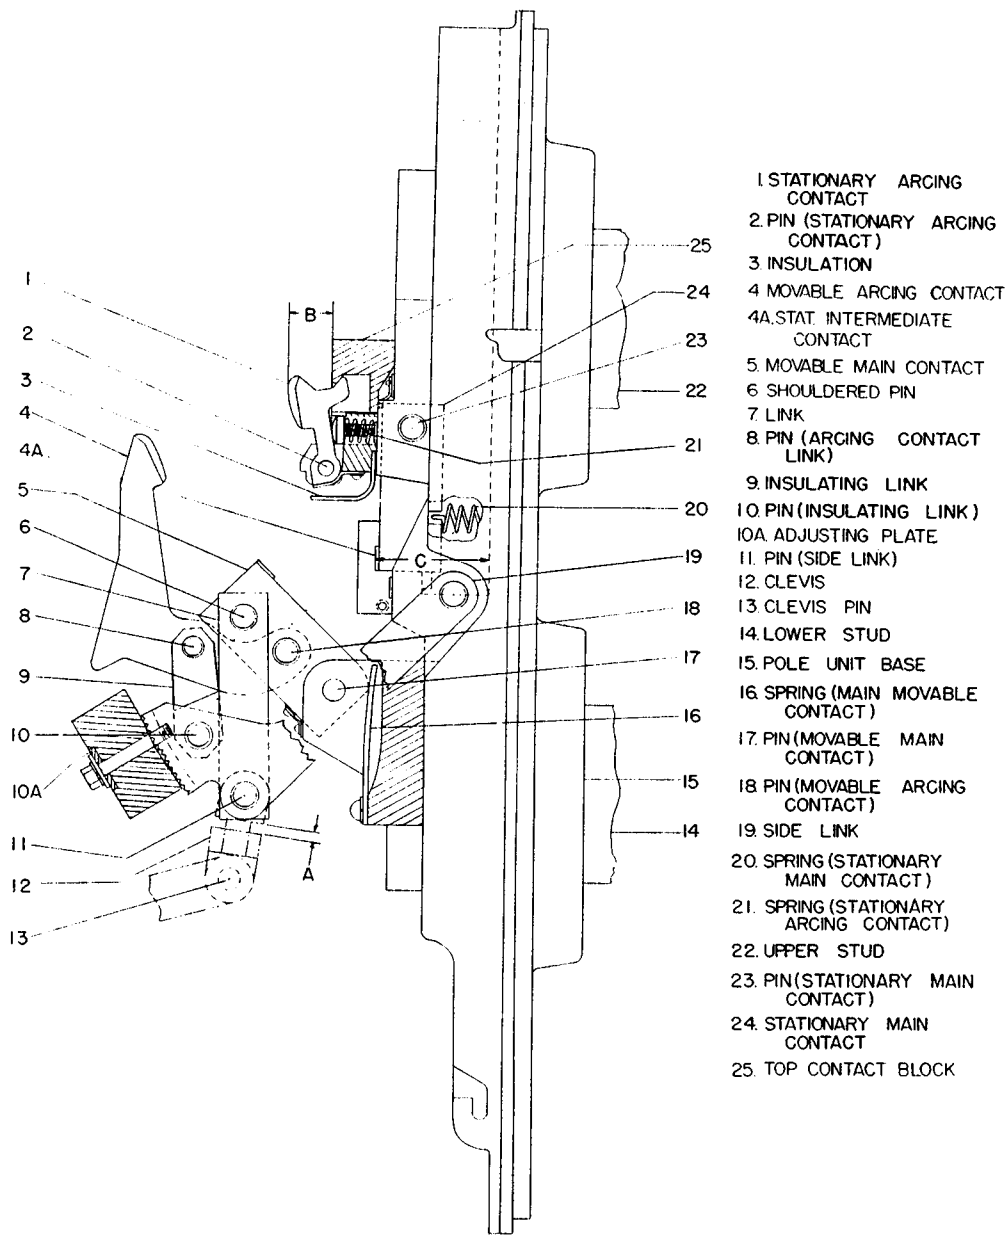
(215D174) Pole unit assembly - AK-75 and AK-100
